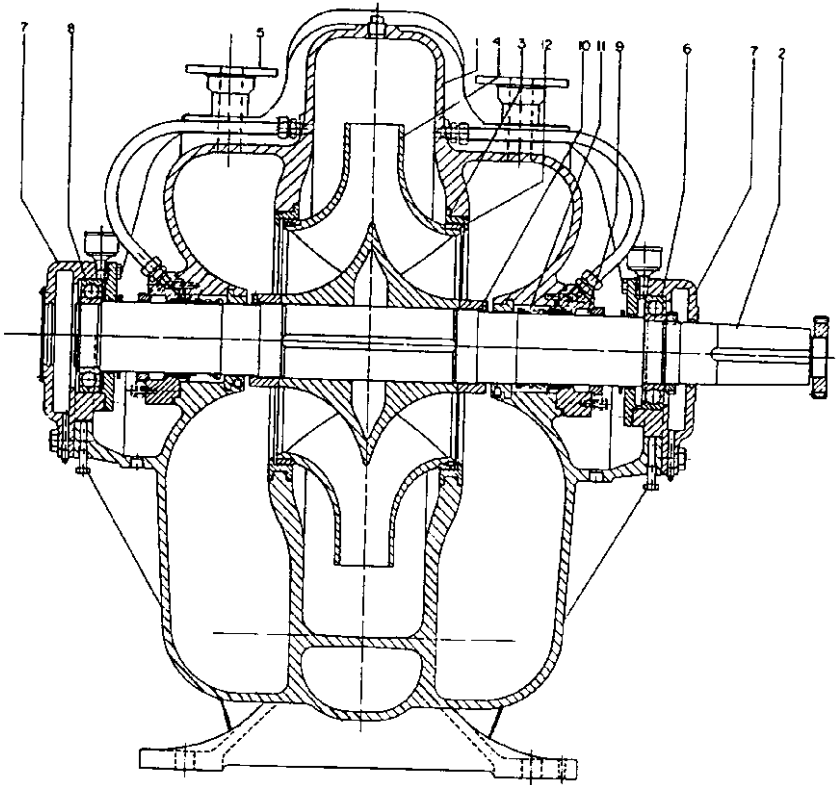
Between bearings centrifugal cargo pump (Flowsolve Corporation)
